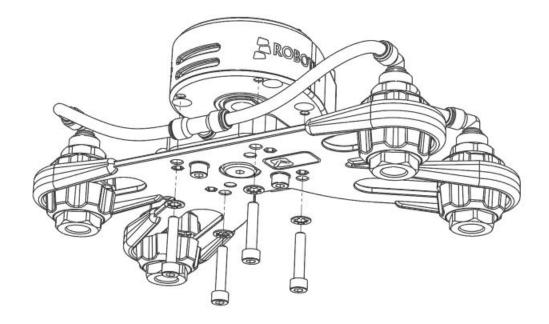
Mounting example of the four suction cups assembly on the vacuum generator
